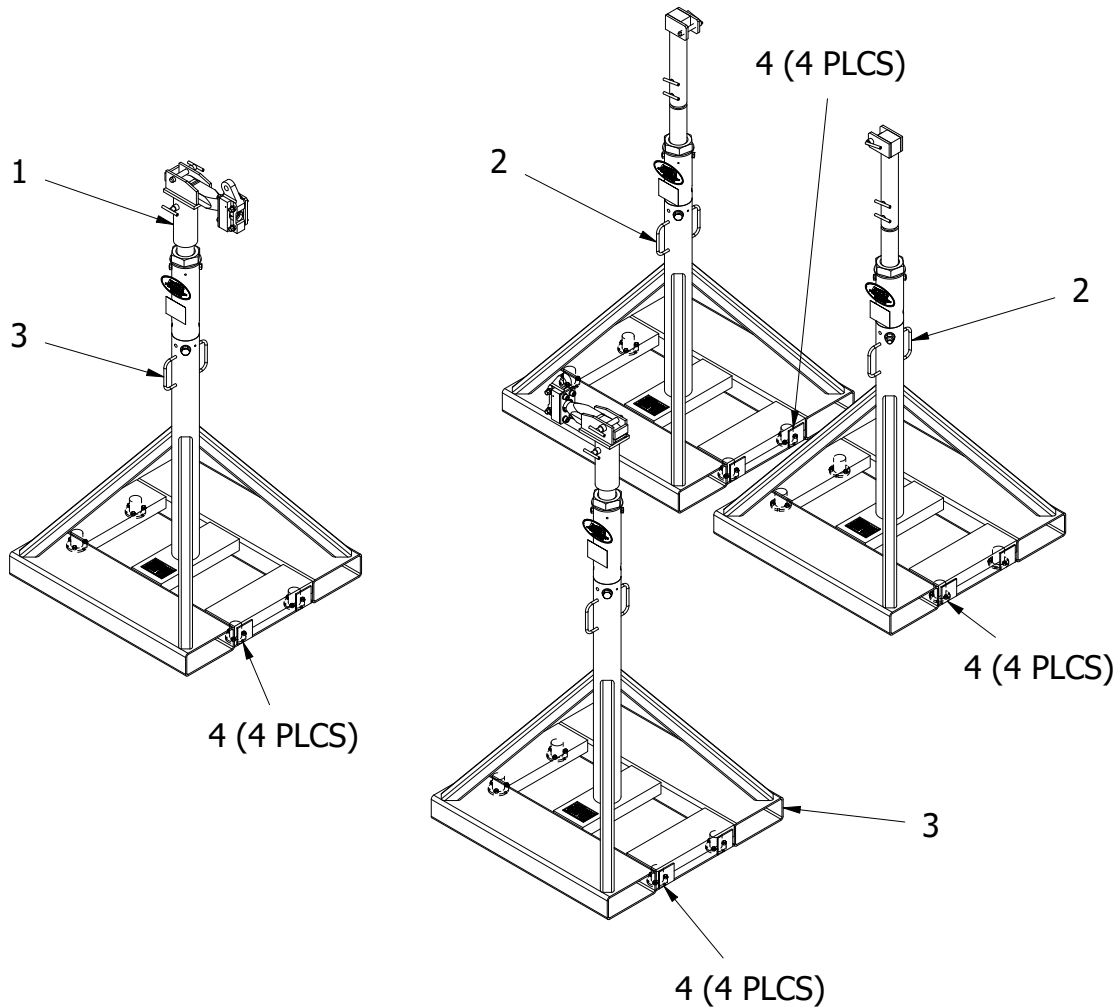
Pedestal Assembly for V2500-A1/-A5
